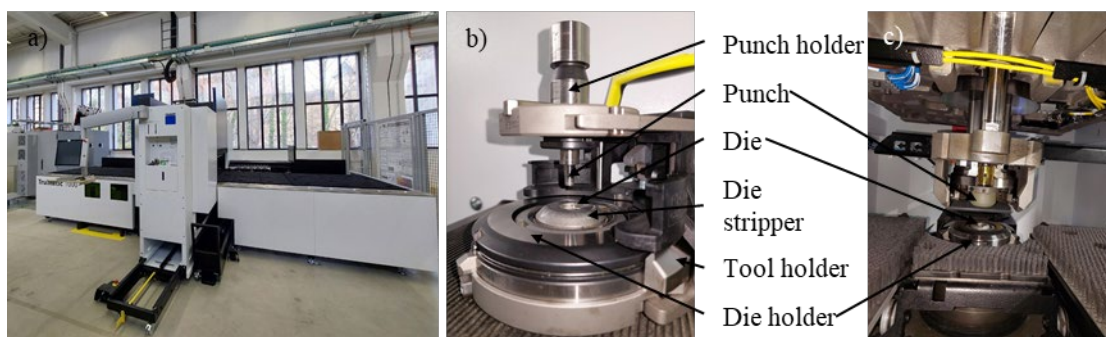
a) Punch laser machine, b) Adapted clinching tool set (for visibility without punch stripper) fixed in the tool holder, c) Tool with punch stripper installed in the machine
